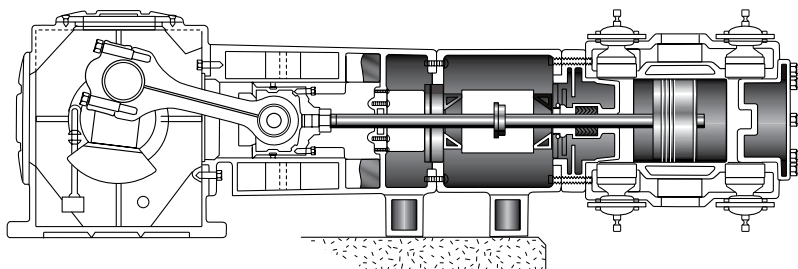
A non-lubricated compressor with piston riding on carbon wearing rings.
